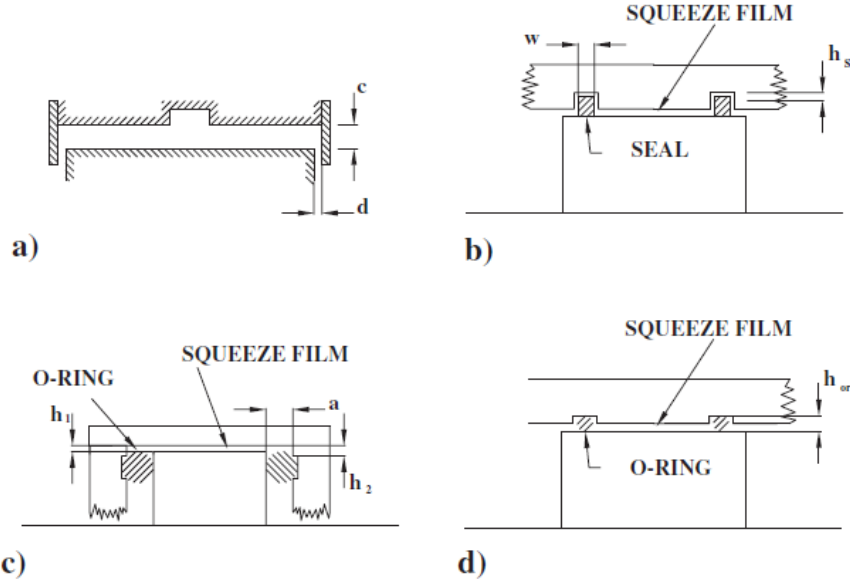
Different types of end seal: a) small clearance seal b) piston ring seal c) O-ring seal on the side d) radial O-ring seal. From [7].
